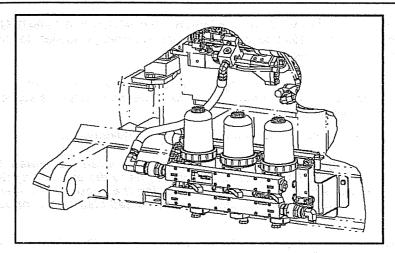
INSTALLED FUEL FILTER ASSEMBLY (TRIPEX FILTER SHOWN)
